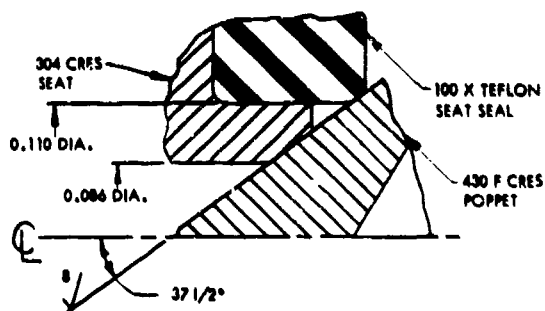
Conical Poppet and Soft Seat for Pressure Regulator Valve
